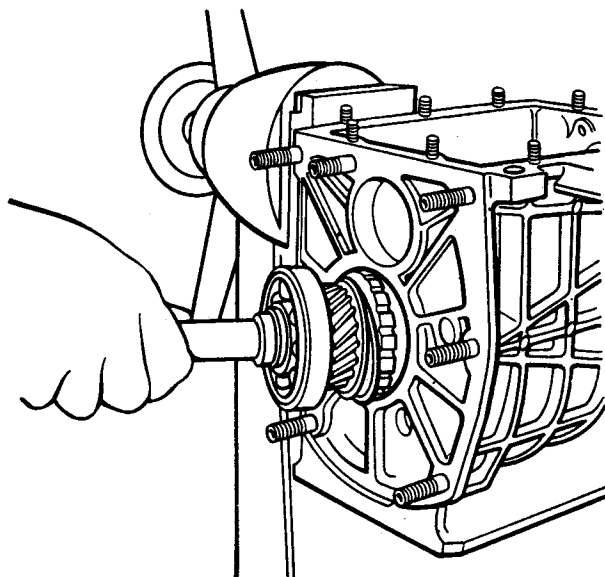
Removing Clutch Shaft from Gearbox Housing
